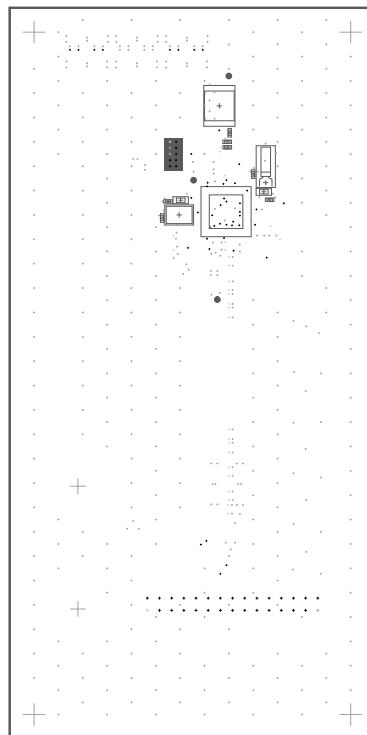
Embedded capacitance 6-layer version 3 design, mechanical drawing bottom.
